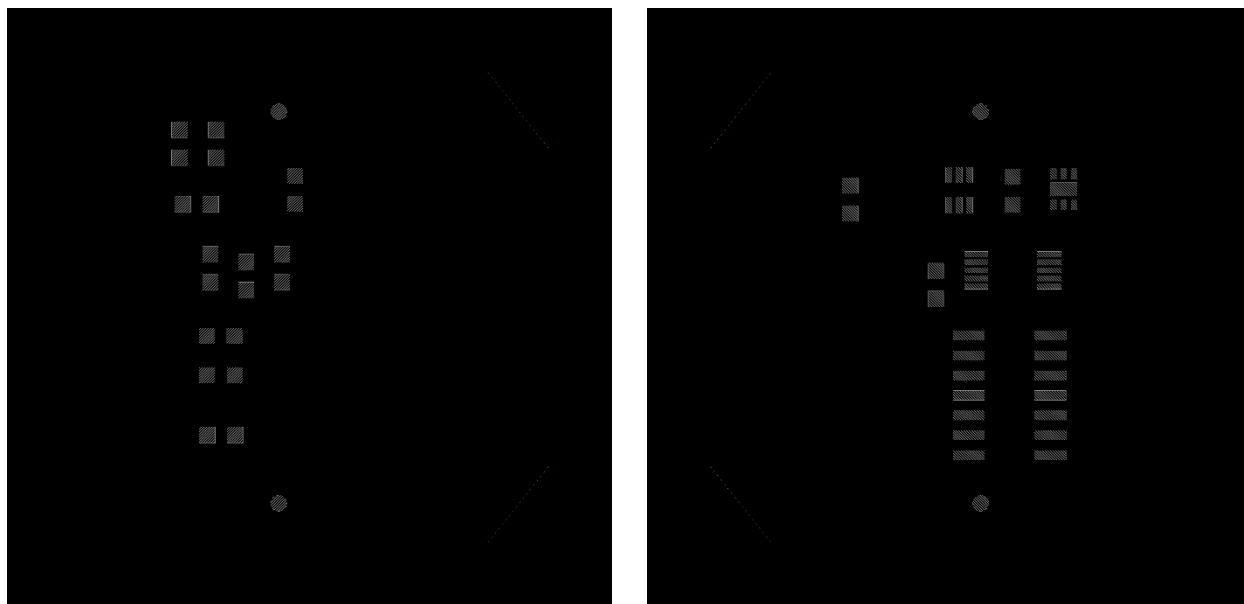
Top and bottom layer solder paste of the driving board for the UV-VIS spectrometer.
